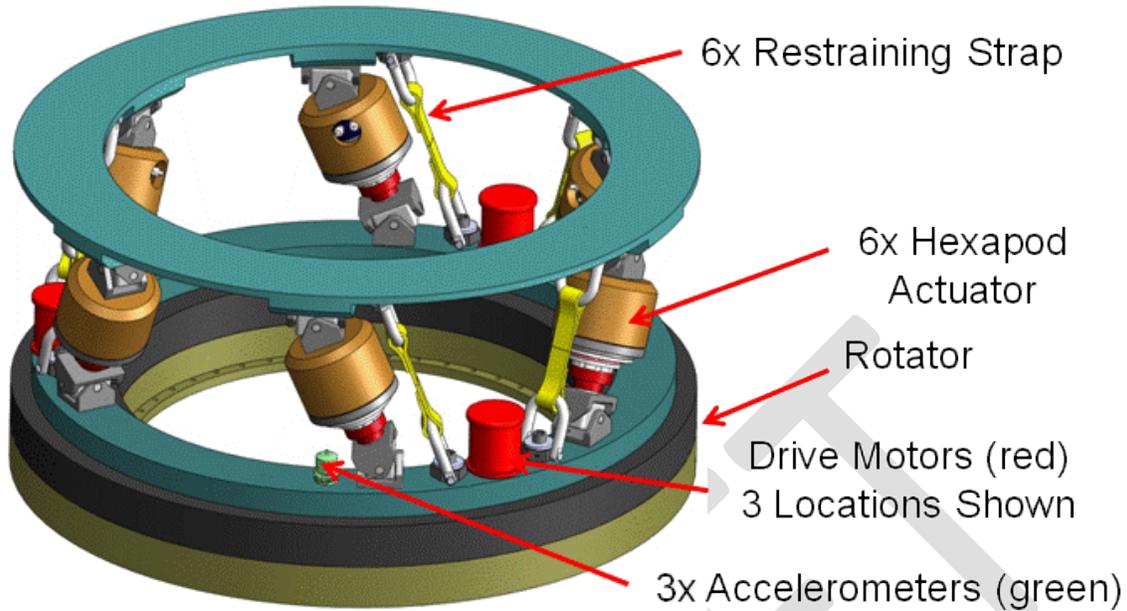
Camera Hexapod/Rotator Assembly
